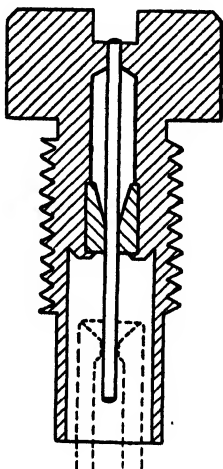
Top bearing in E.A.C. single-phase meter.
